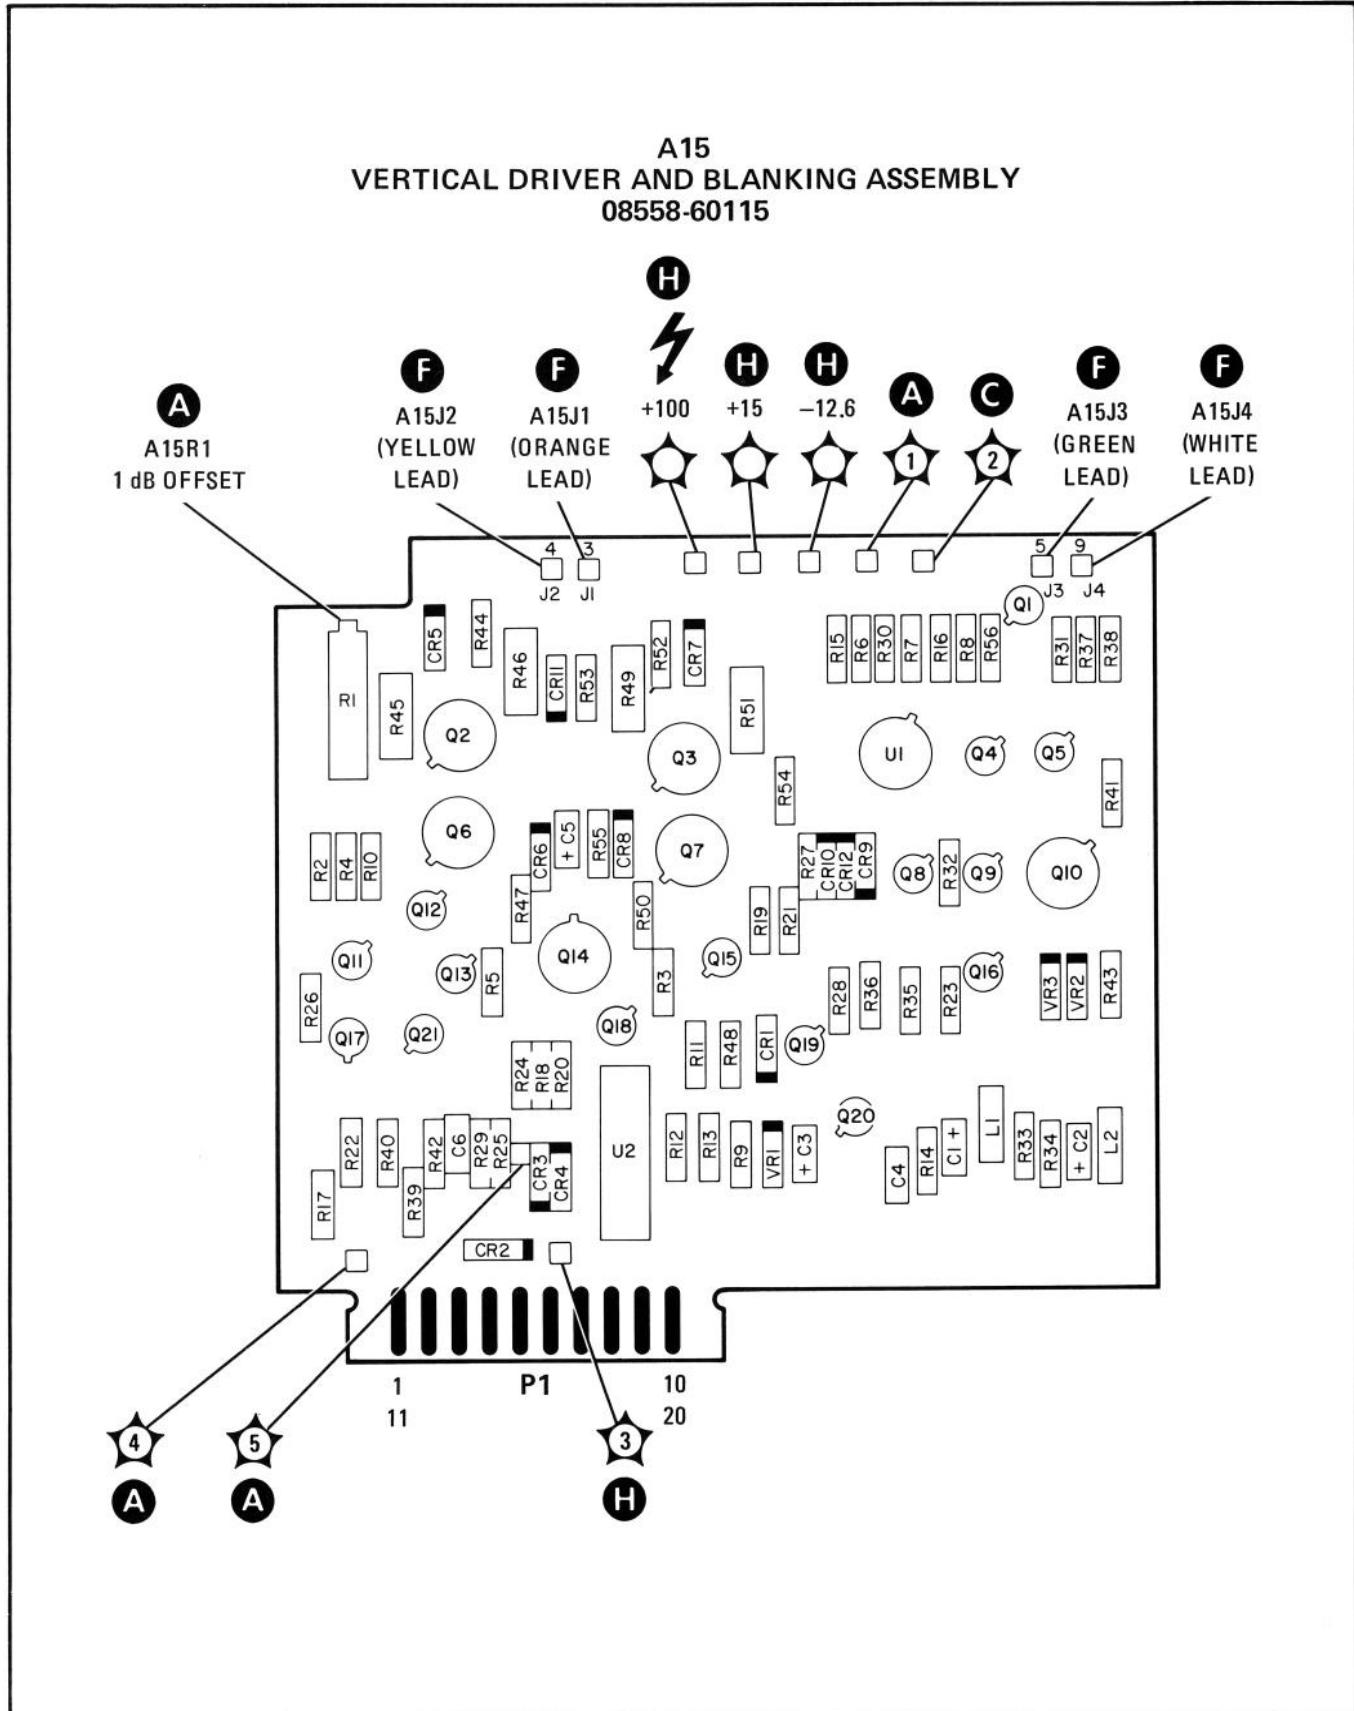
A15 VERTICAL DRIVER AND BLANKING ASSEMBLY, COMPONENT LOCATIONS
